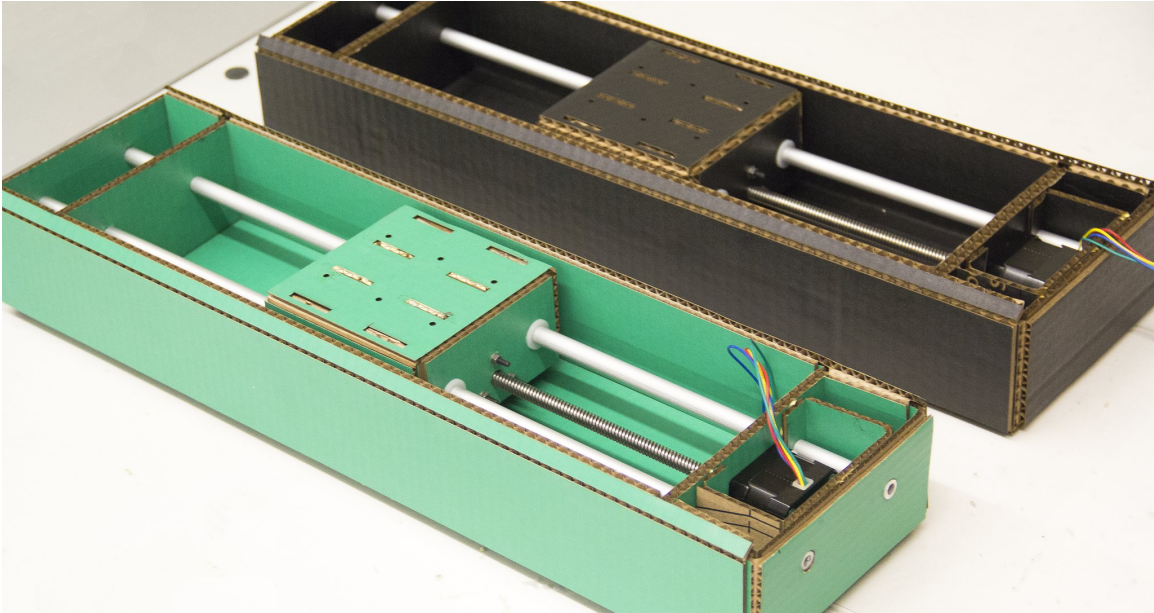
Linear stages made out of cardboard. They use nylon bushings, aluminium tube guide shafts, and stepper motors with integrated lead screws. They have 30cm of travel and three standard coupling configurations.
